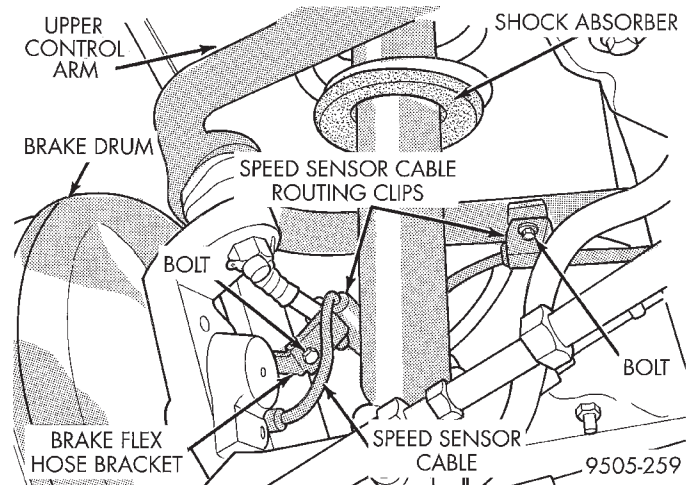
Speed Sensor Cable Attachment To Control Arm
